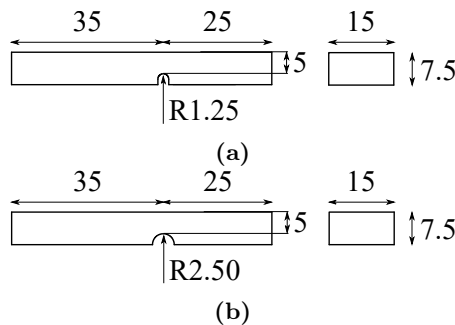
Geometries of (a) the R1.25 bending specimen and (b) the R2.50 bending specimen. Dimensions in mm.
